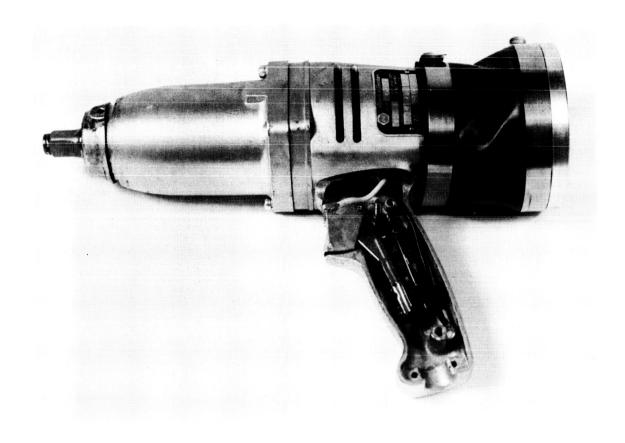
IMPACT WRENCH WITH TRIGGER EXPOSED
